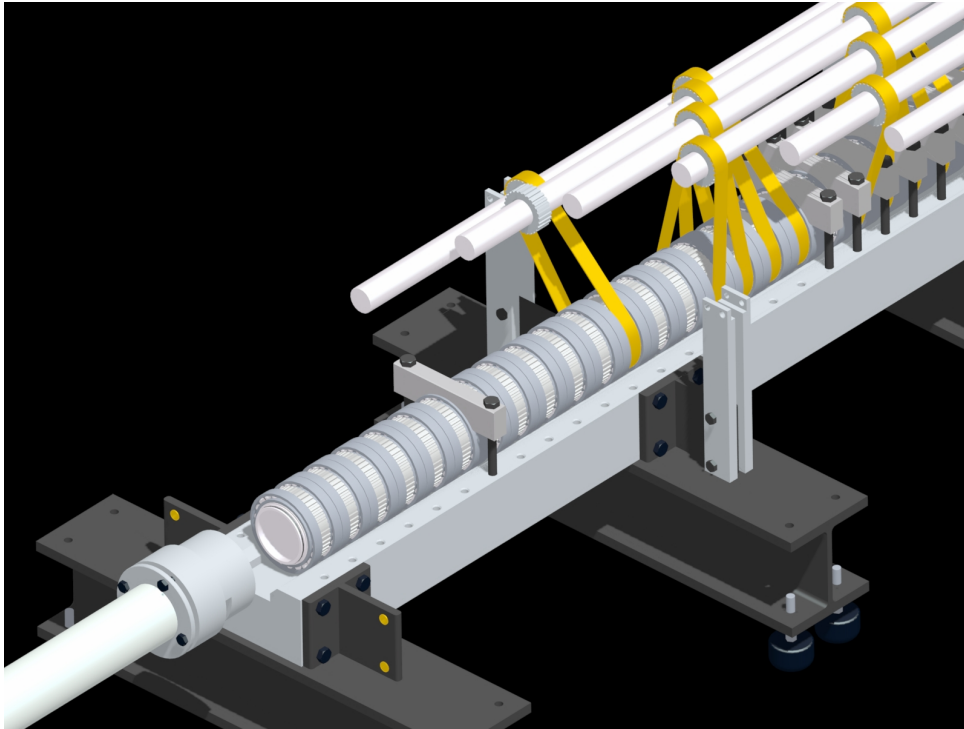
Close-up of the drawing of the trasmission system: detail of the shafts, belts and rotating segments, lined on the steel rail.
